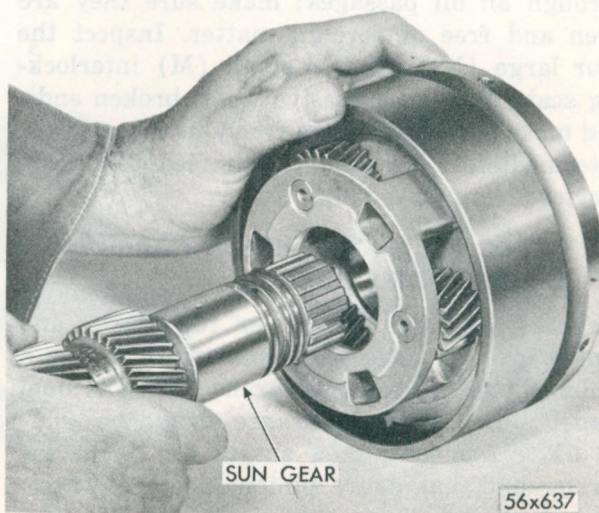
Removal and Installation of Sun Gear (Reverse Planet Pinion Carrier and Overrunning Clutch Assembly)
